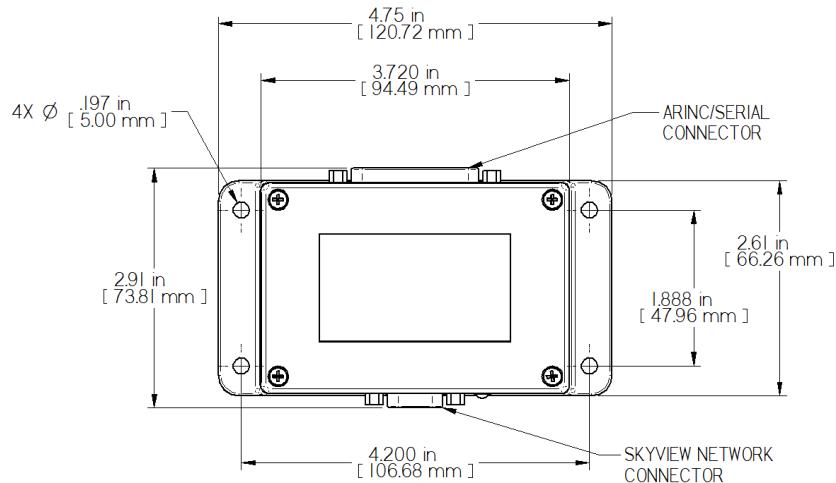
SV-ARINC-429 Mounting Dimensions with Electrical Connections
